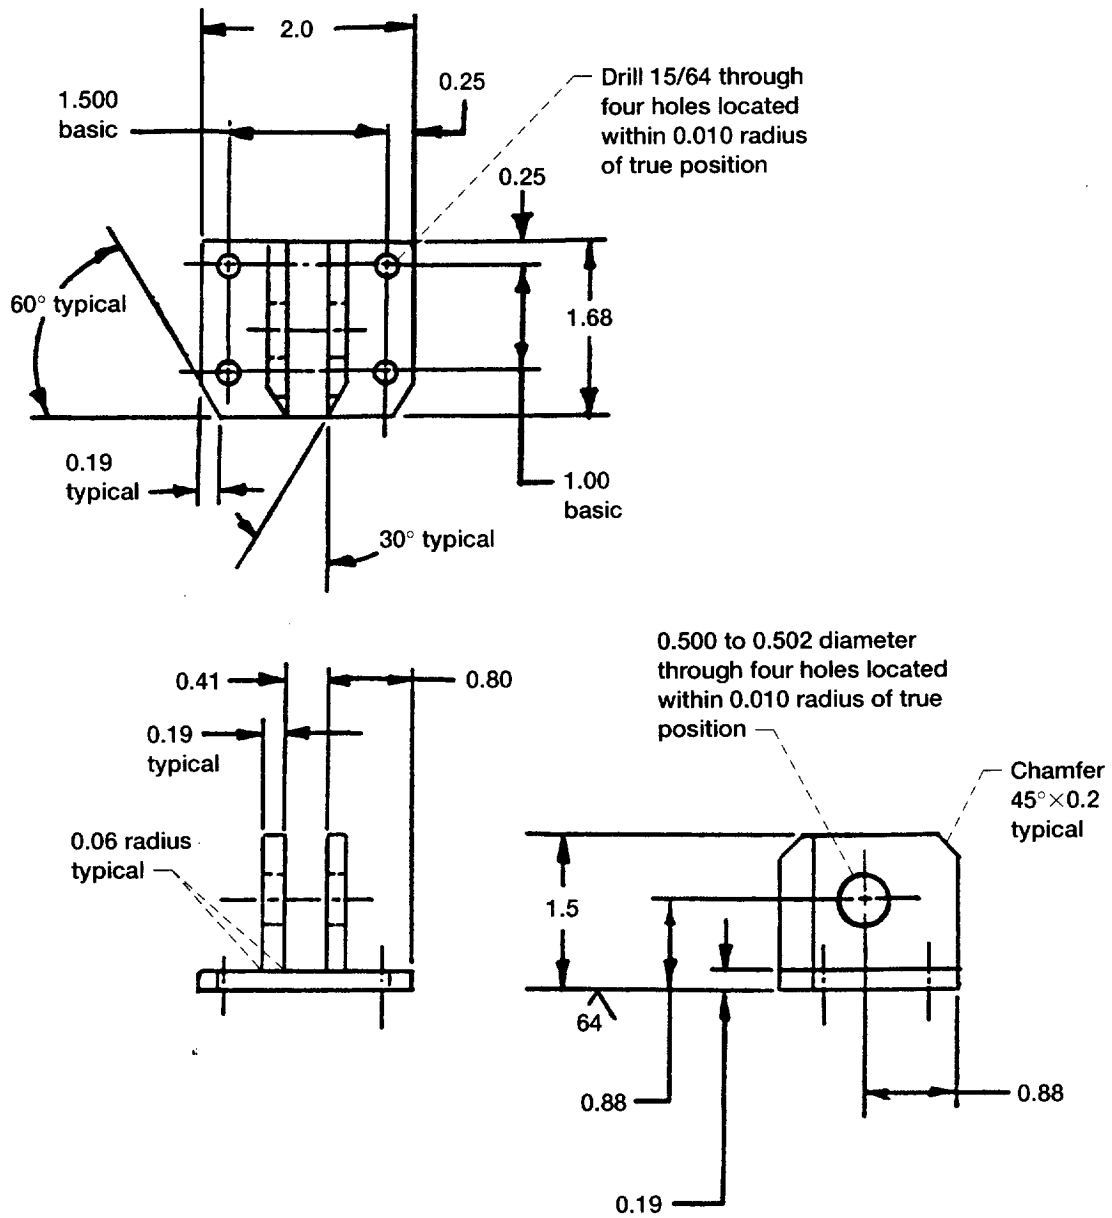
Support clevice. All dimensions are in inches unless marked otherwise.
